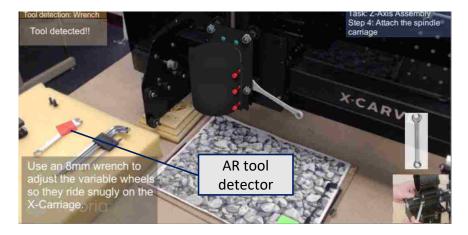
AR integrated with the tool detector for Step 4 of the assembly task
